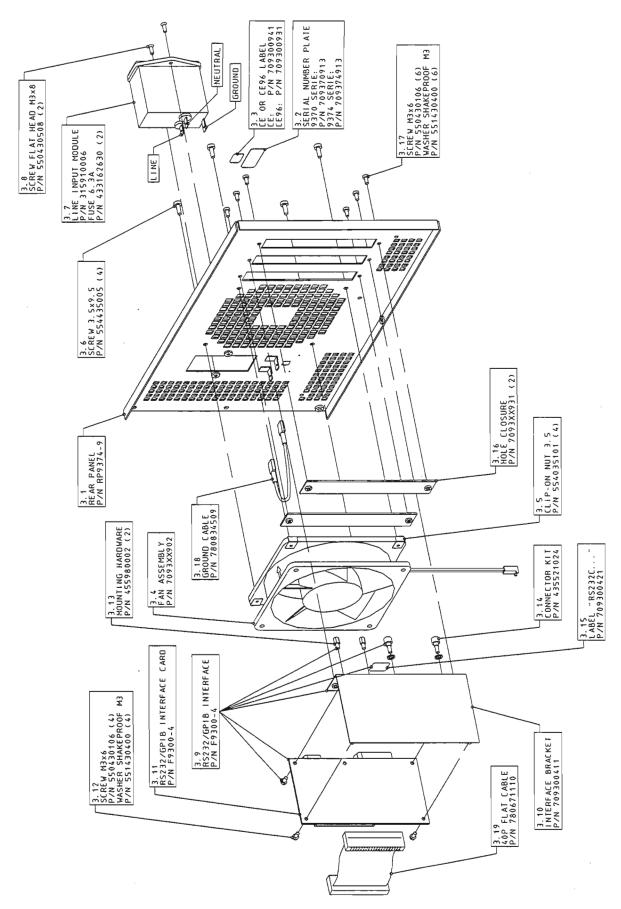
9374/M/L/TM Rear Panel Assembly
